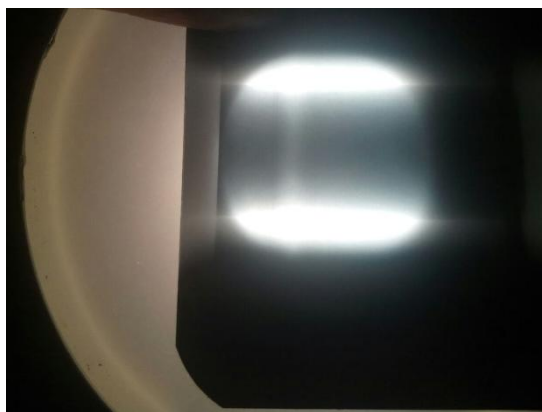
BMA to Dome Cir-seam Weld without inside gap
